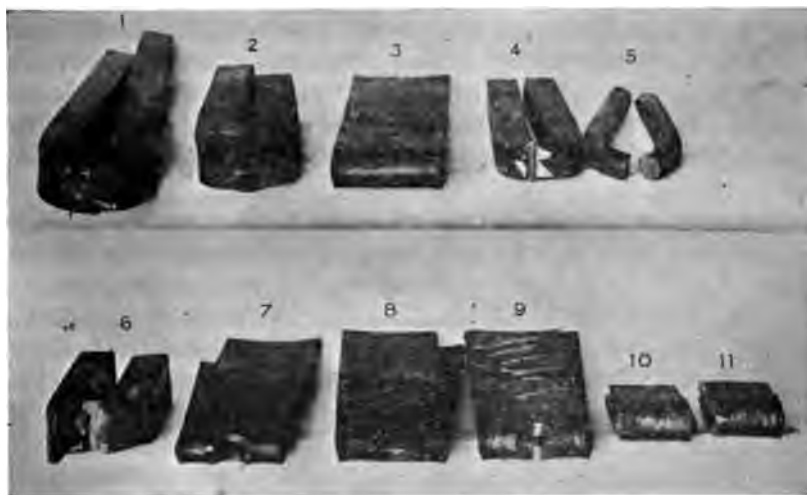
Results of Cold Bend Tests. (1)  $\frac{3}{4} \times 1$ -in. Wrought Iron Bar, Note Cracks; (2)  $\frac{3}{4} \times 1$ -in. Mild Steel Bar; (3)  $\frac{3}{4} \times 2$ -in. Mild Steel Flat; (4)  $\frac{3}{4} \times \frac{3}{4}$ -in. Cold Rolled Bar; (5)  $\frac{3}{4}$ -in. 0.90% Carbon Steel Rod; (6)  $\frac{3}{4} \times 1$ -in. Wrought-Iron Bar Nicked and Bent, Note Cracks at Left; (7) Mild Steel Flat Punched and Bent with Die Side Outside; Note Cracks; (8) Mild Steel Flat Punched and Bent with Die Side Inside; (9) Mild Steel Flat Drilled and Bent; (10) Mild Steel Flat Sheared along Edges and Bent with Die Side Inside; (11) Mild Steel Flat Sheared along Edges and Bent with Die Side Outside, Note Cracks.
